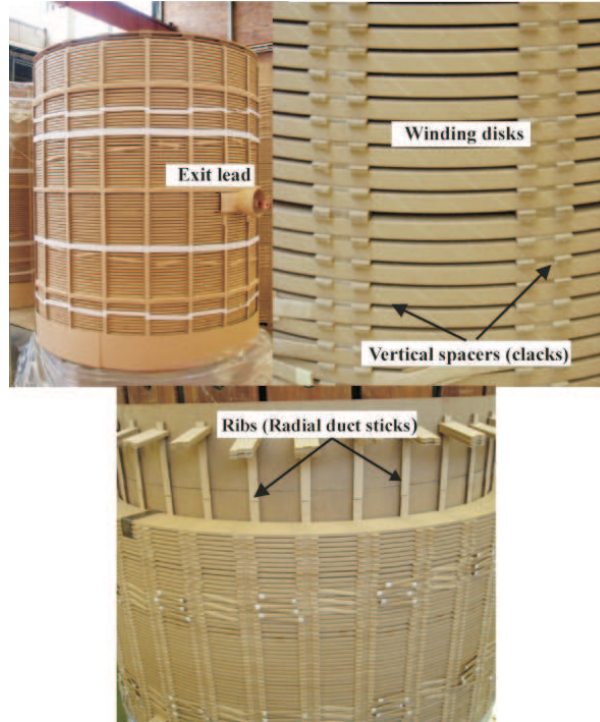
Physical construction of transformer winding. On the top left, a photo shows the full winding and the right is the magnified section of the winding showing axial spacers. The bottom section of photo shows the duct sticks (ribs).
